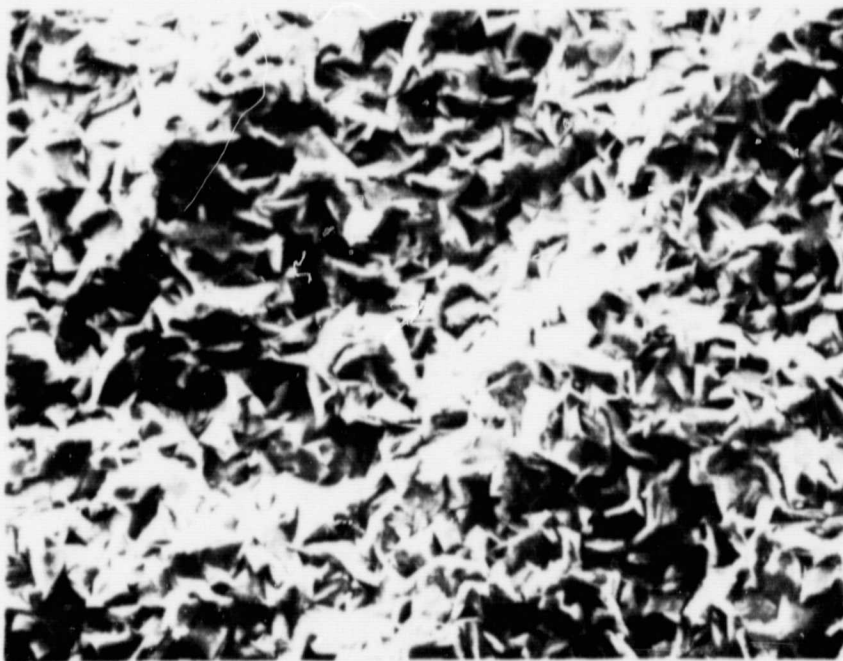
Fracture surface of the same specimen, away from fracture origin. Fracture character is almost perfectly intergranular (X320).
